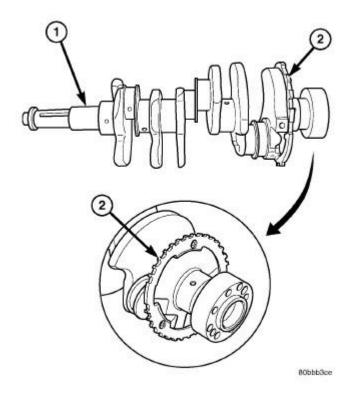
CRANKSHAFT AND TARGET RING Courtesy of CHRYSLER LLC
